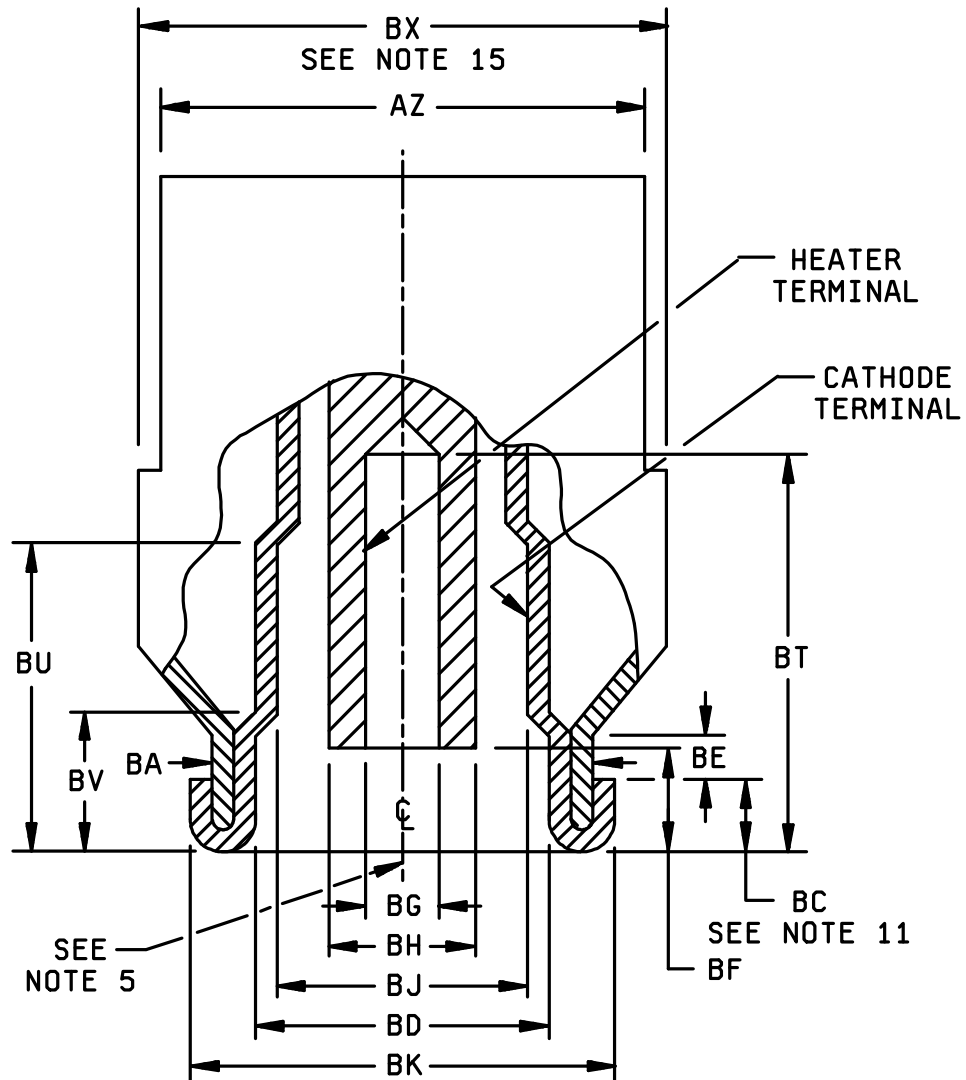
Outline drawing of electron tube type DOD-042 (detail enlarged).
